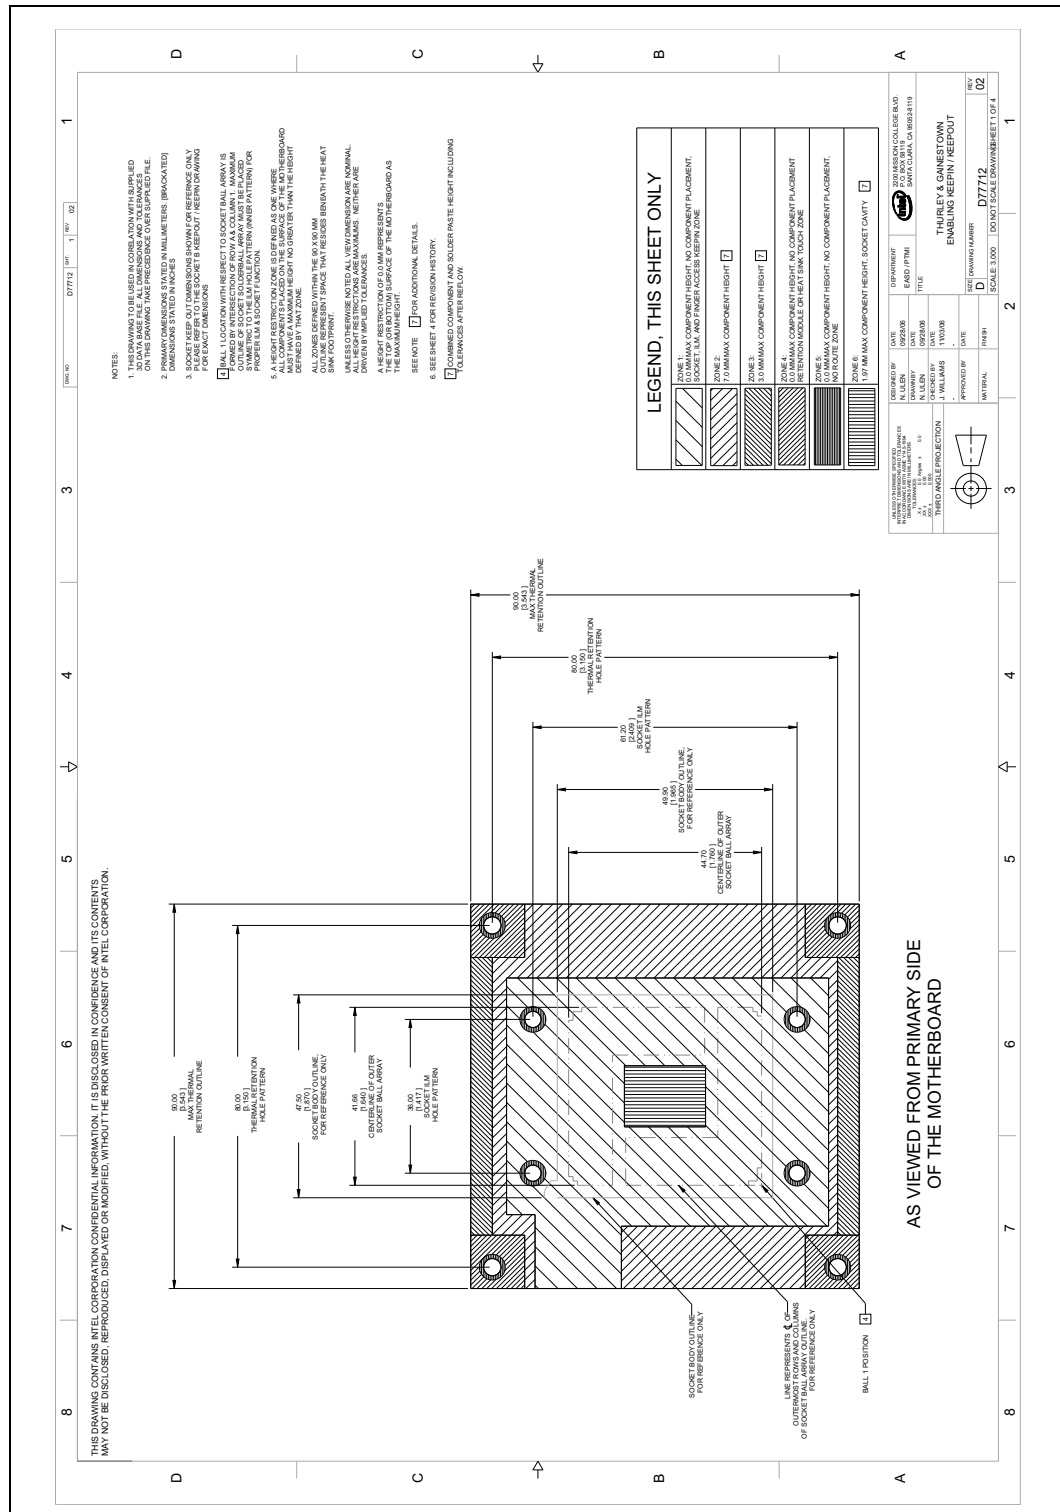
Top Side Baseboard Mounting-Hole Keep-Out Zones
